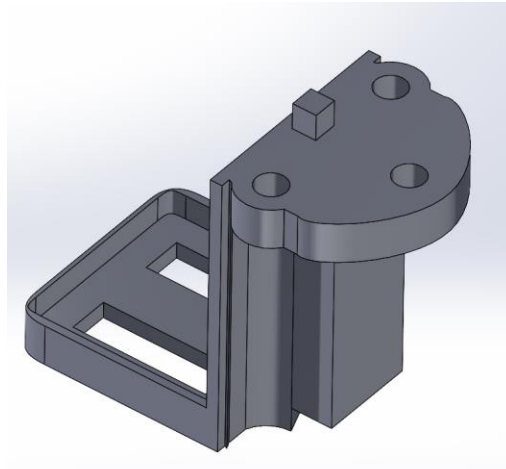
Magnetic Potentiometer Mount in 3D Printing Position
